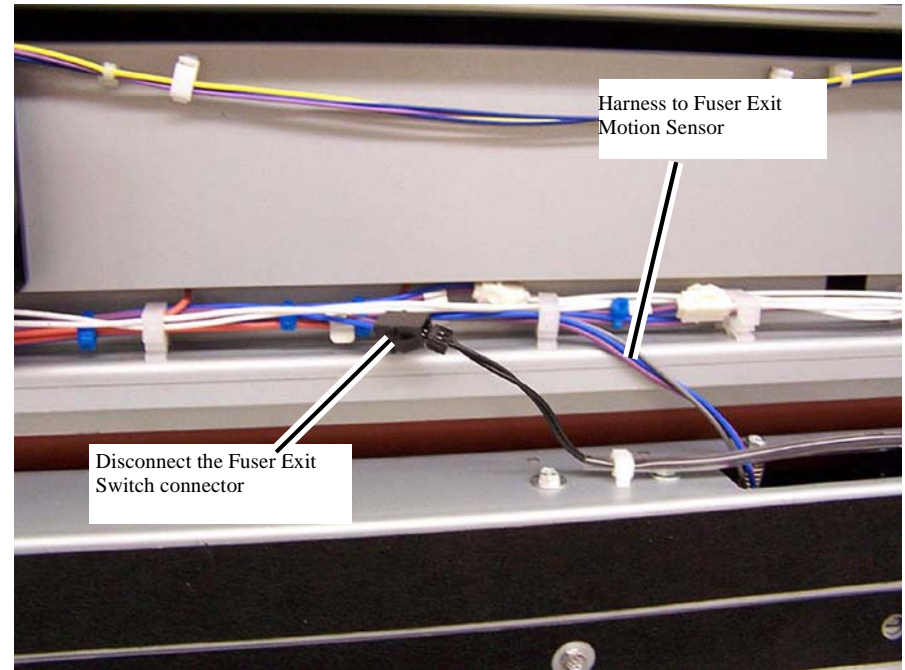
Disconnecting the Fuser Exit Motion Sensor and the Fuser Exit Switch
